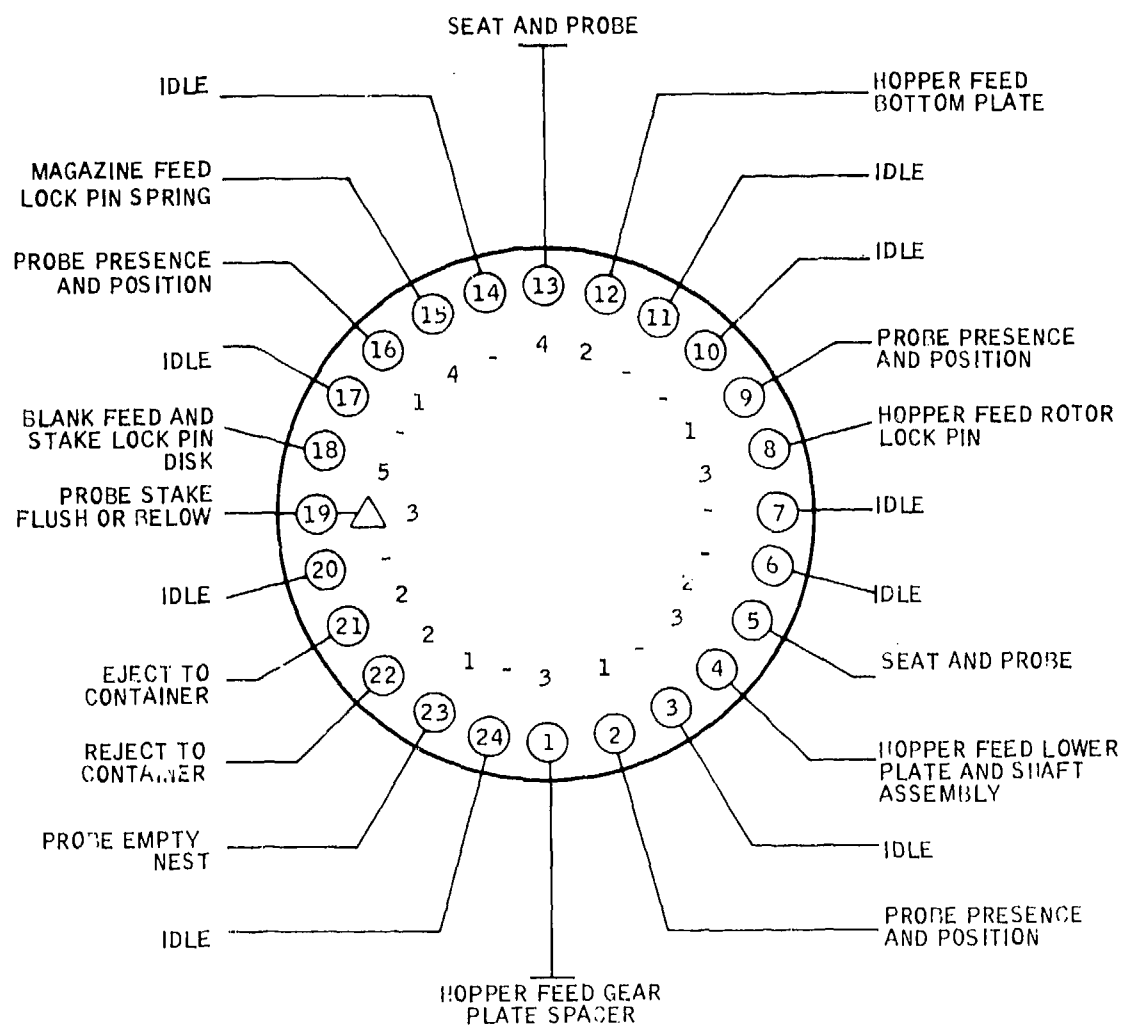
Dial schematic, machine S2 - S&A module lower subassembly operation 2
